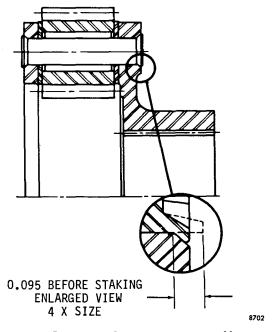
Low-range planetary carrier assembly cross-sectional view
